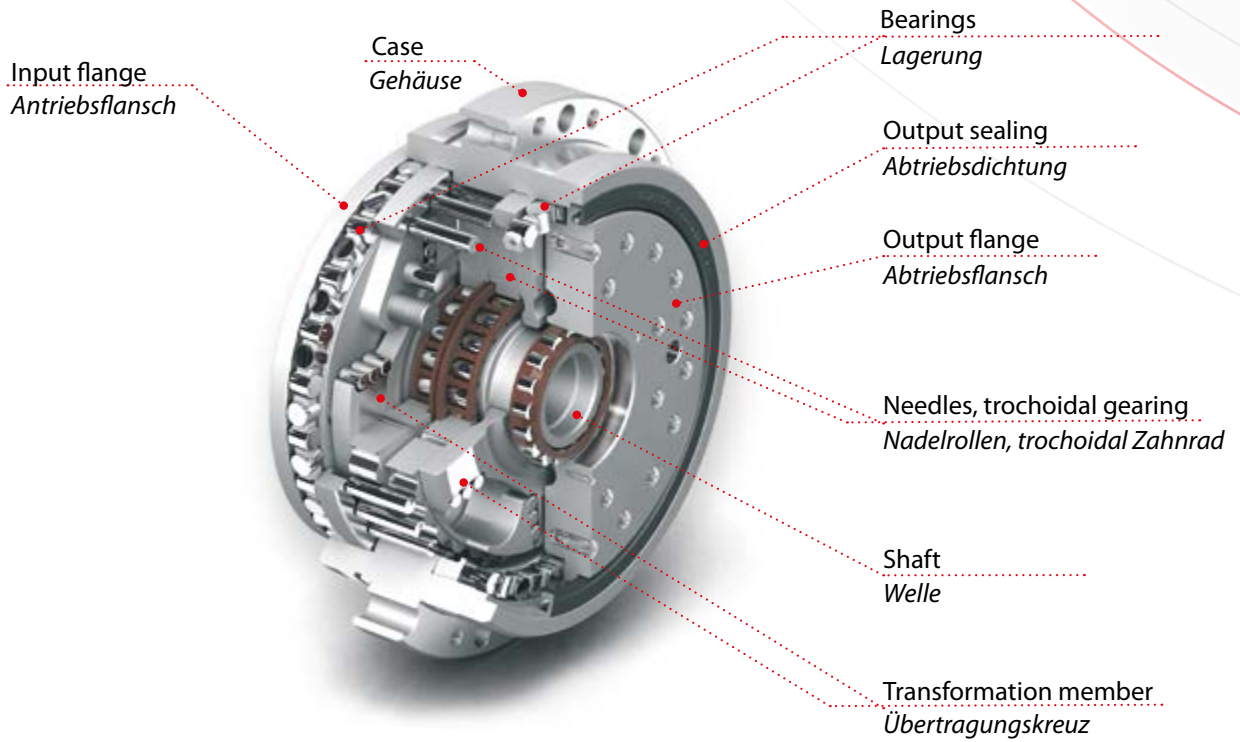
TwinSpin cross section | Konstruktiver Aufbau TwinSpin
